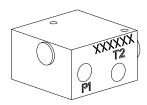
View of P1 & T2 Side of Flow Valve Identification Markings
